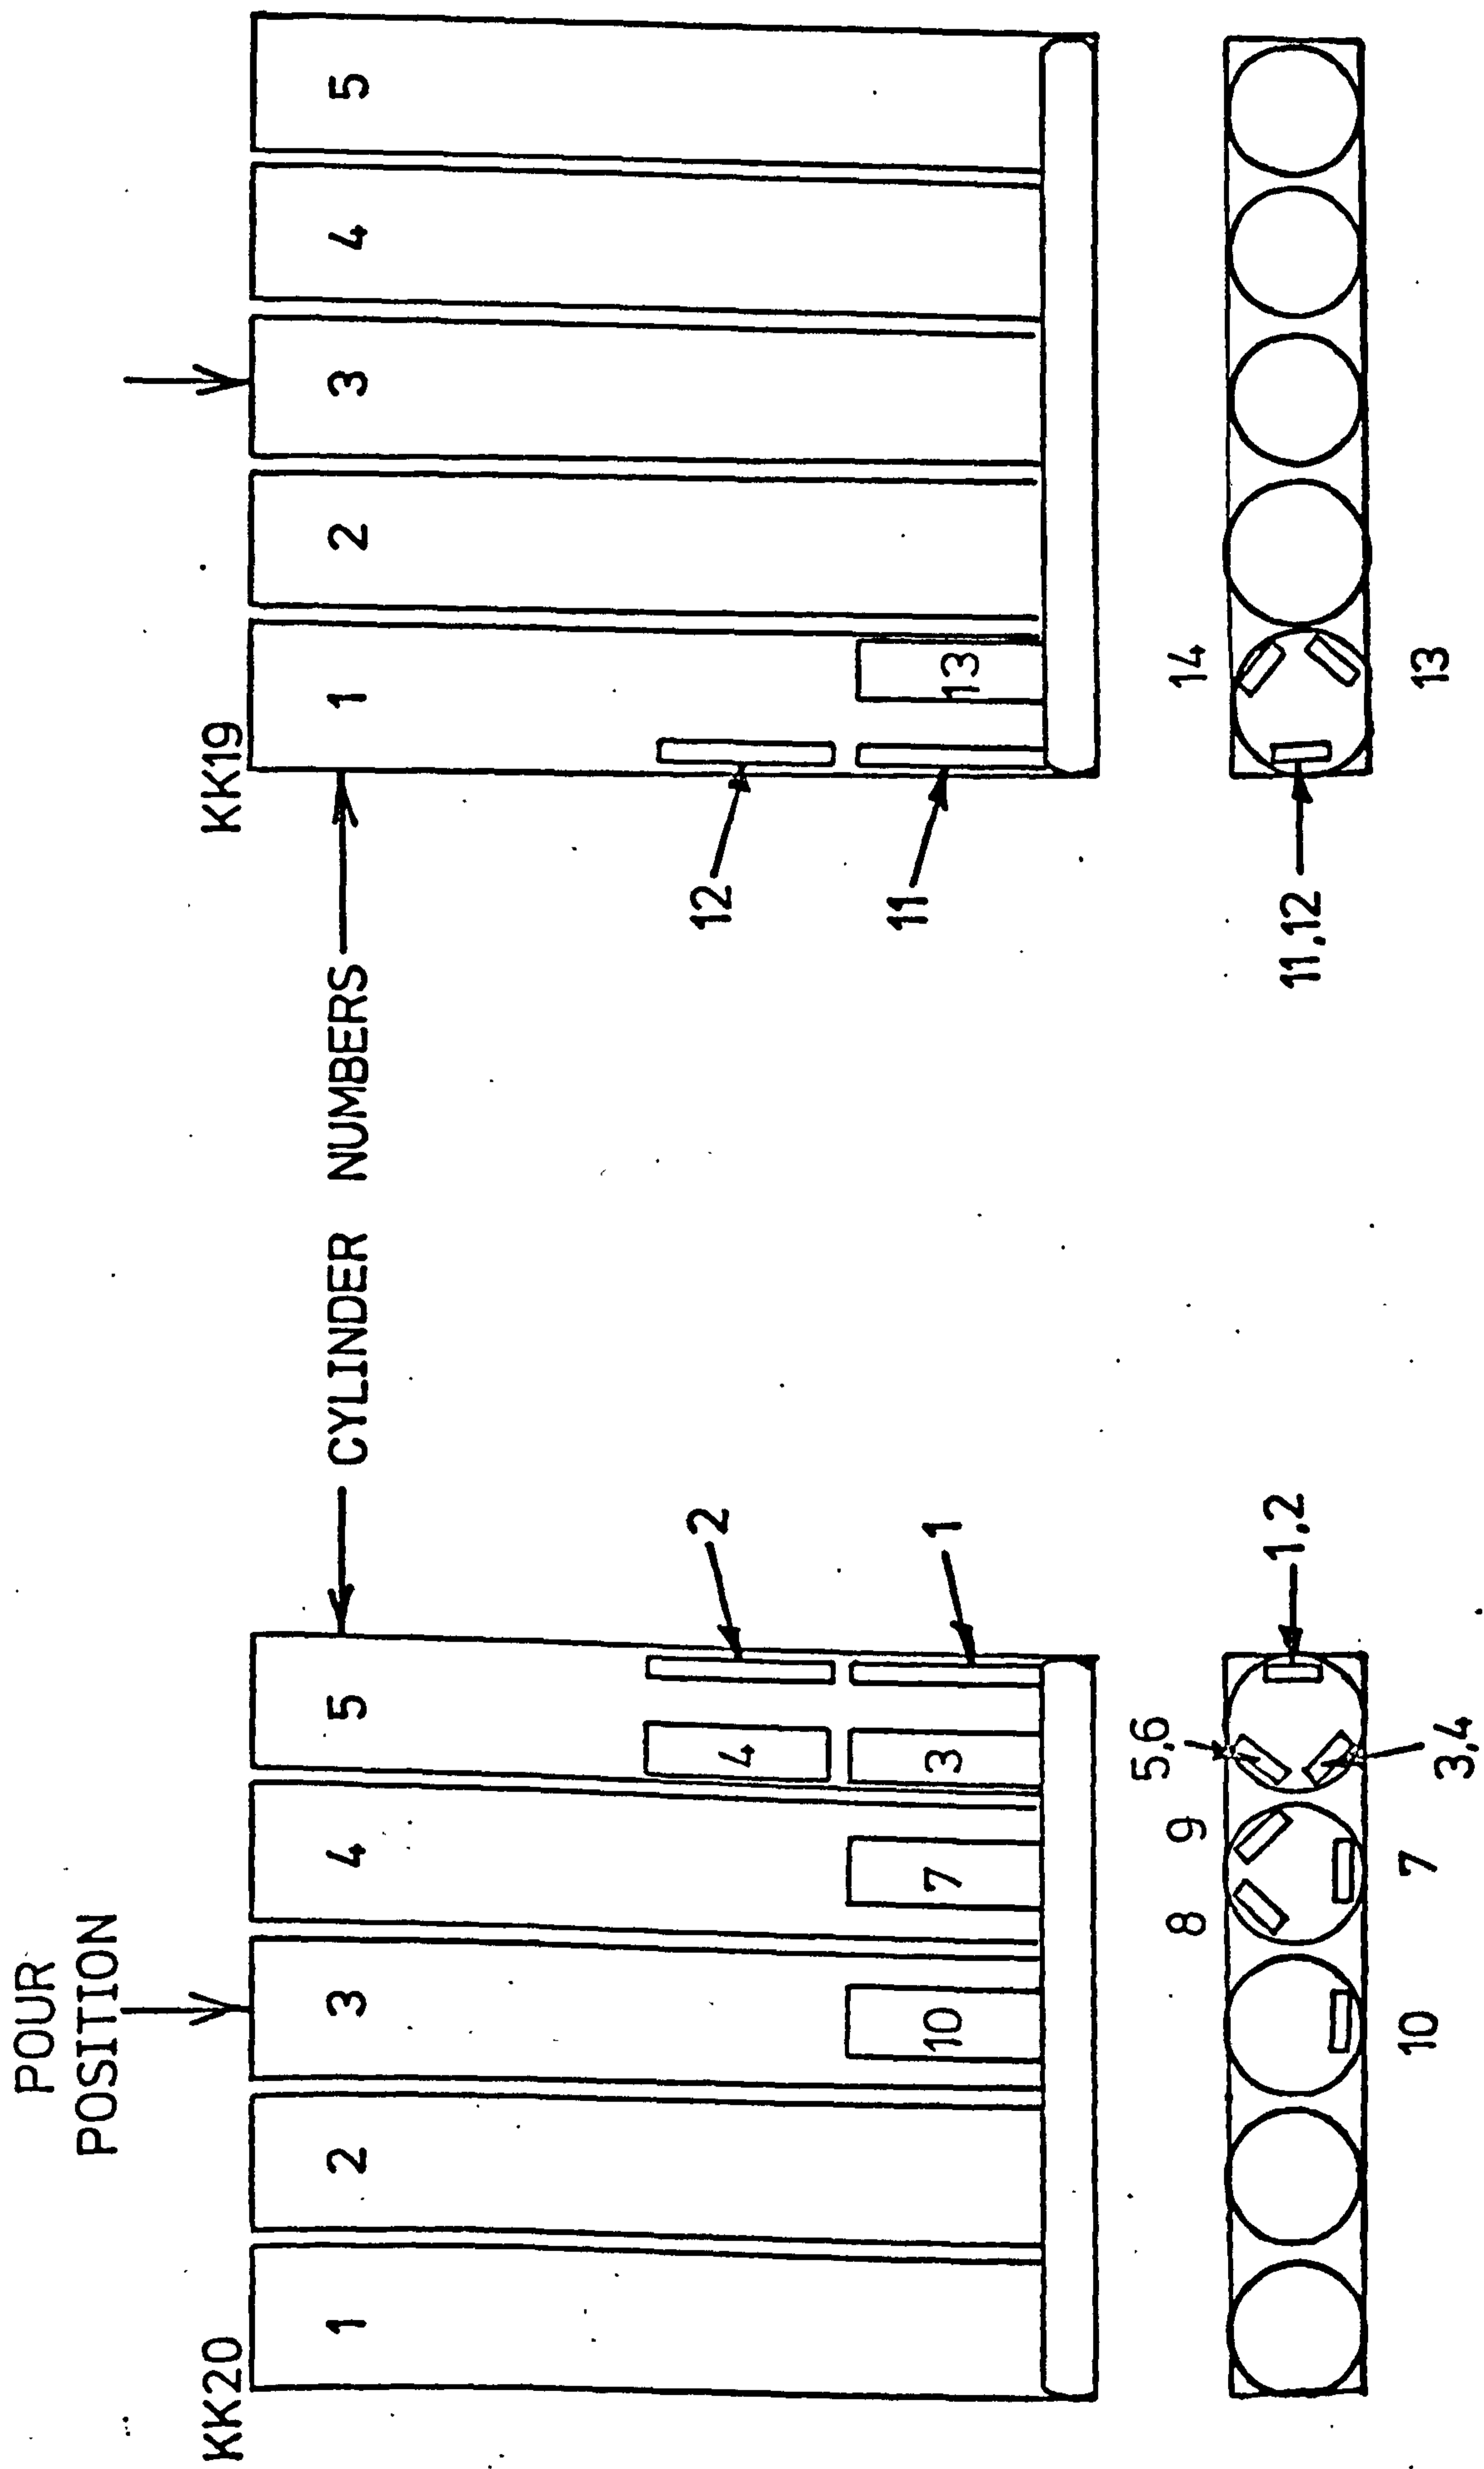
POSITIONS OF THE UNIAXIAL SPECIMENS FROM THE MULTI-CYLINDERS CASTINGS
